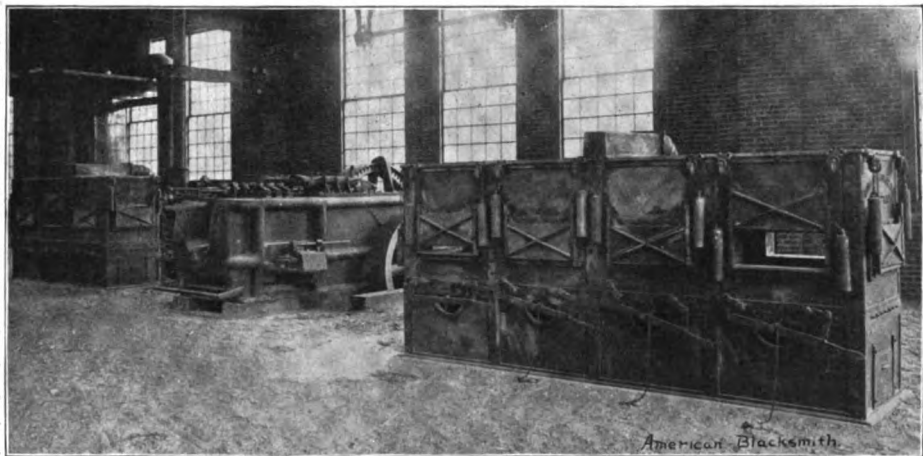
HEATING FURNACES MADE OF SECTIONS OF CAST IRON.
